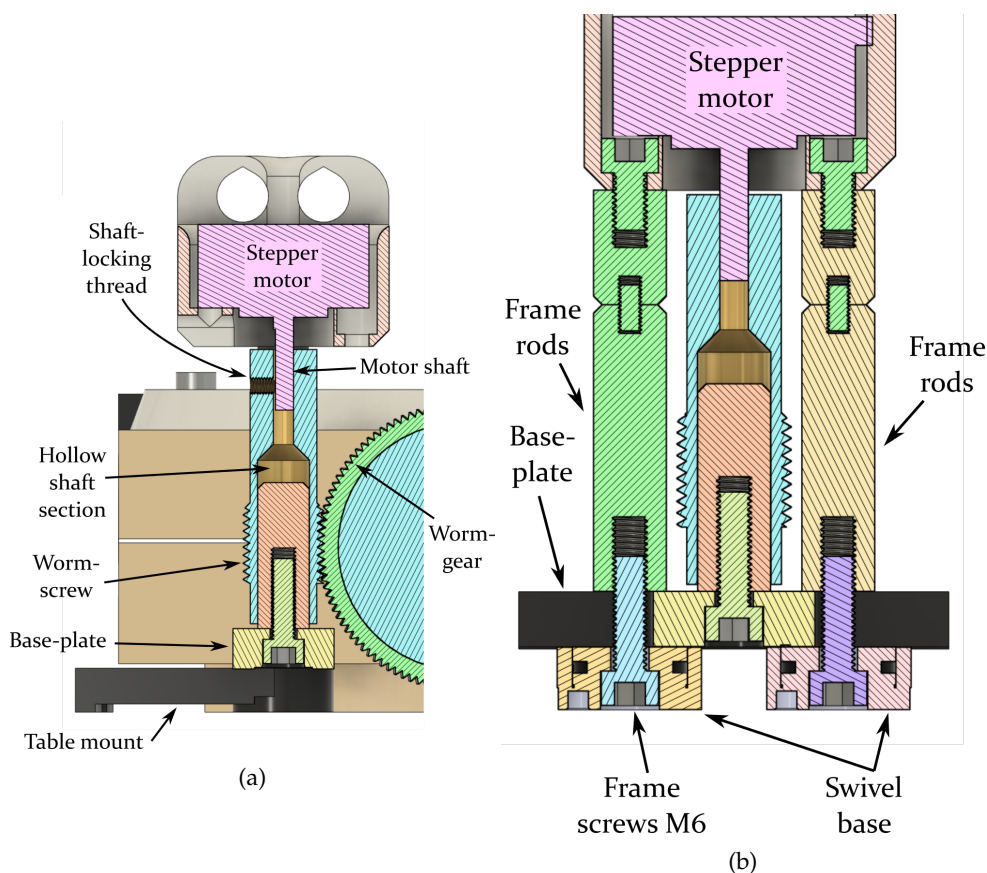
Cross section views of the X-axis motor assembly in two different planes: (a) through the worm-screw and bisecting the worm-gear axis, and (b) through the worm-screw, framing rods, and swivel base adapters.
